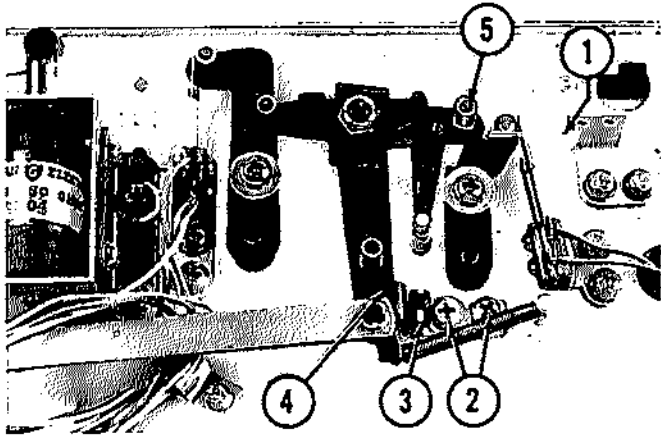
STOP BRACKET ADJUSTMENT, LATCH SOLENOID
